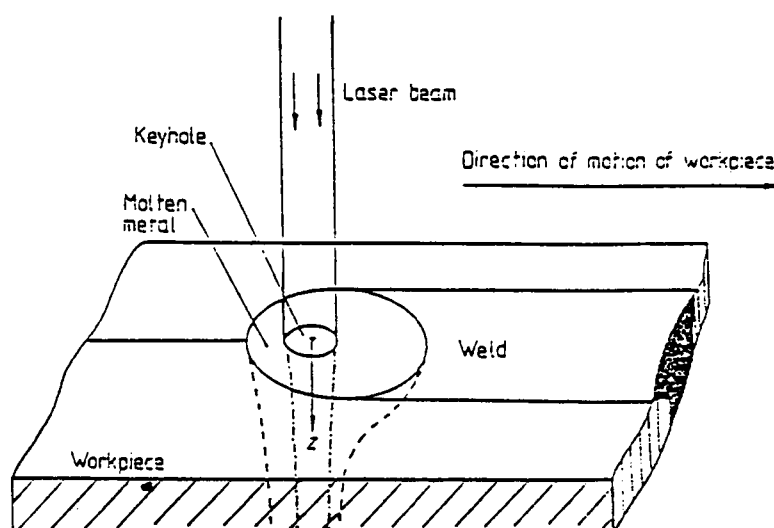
Geometry of the CO₂ laser beam relative to the workpiece in laser keyhole welding [picture taken from [7] Dowden, J.; Kapadia, P.; Postacioglu, N.; *An analysis of the laser-plasma interaction in laser keyhole welding*; J. of Physics D, Applied Physics, Vol. 22, pp. 741 - 749]
